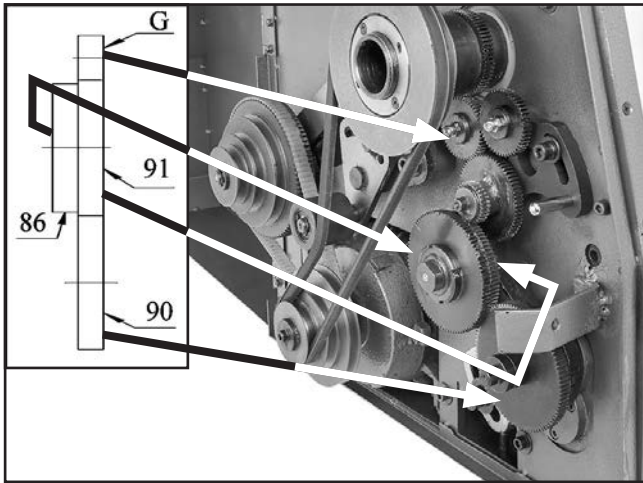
identifies the end gears on the upper, middle, and lower shafts. The gears are represented by letters.
